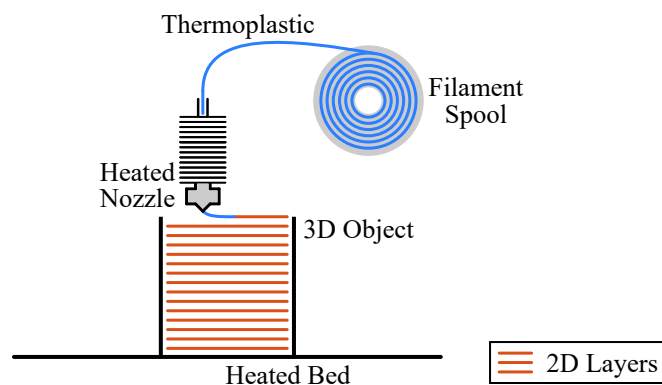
Schematic of a Fused Deposition Modelling 3D printer
